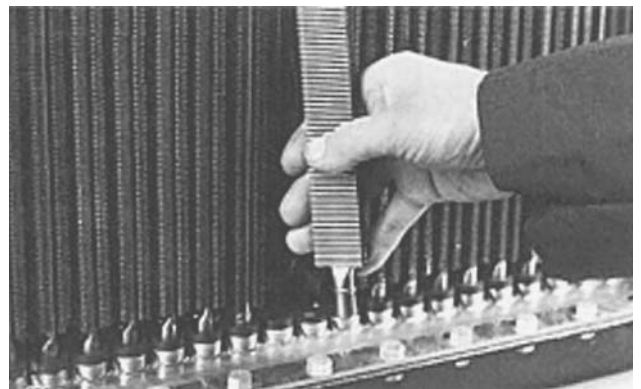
ANGLING TUBE DURING REMOVAL
